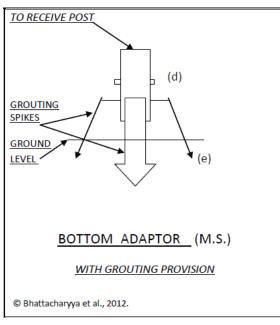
Elevation of bottom grouting part of the adjustable trap (For labels see text)
